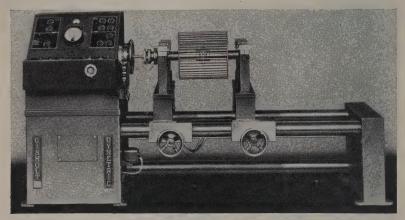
The Gisholt Dynetric Type 4 ½ U Balancing Machine.
